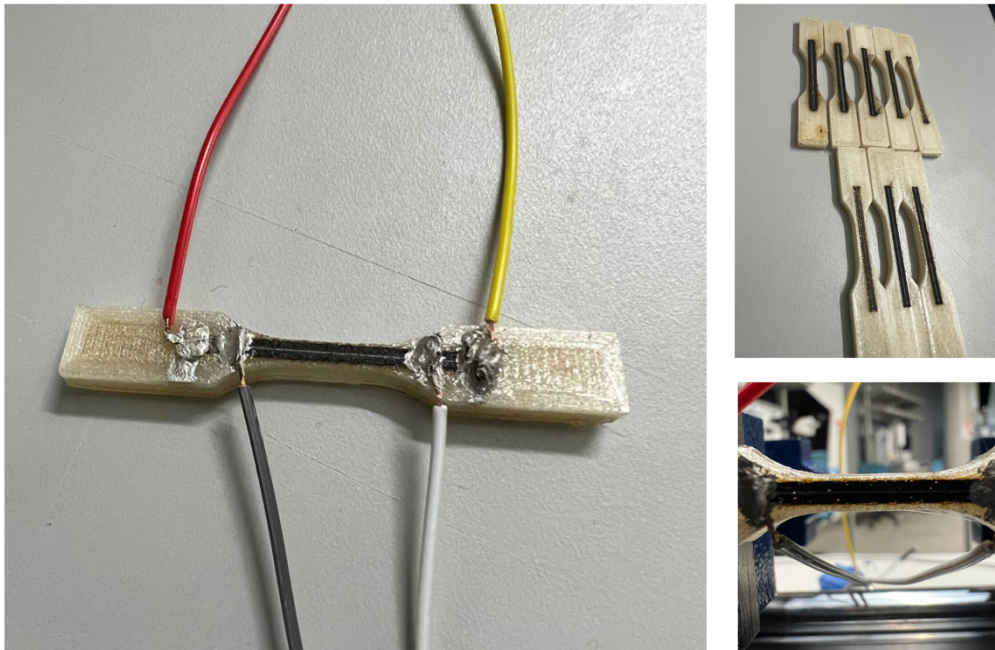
Strain gauge engraved on 3D printed PSU.
